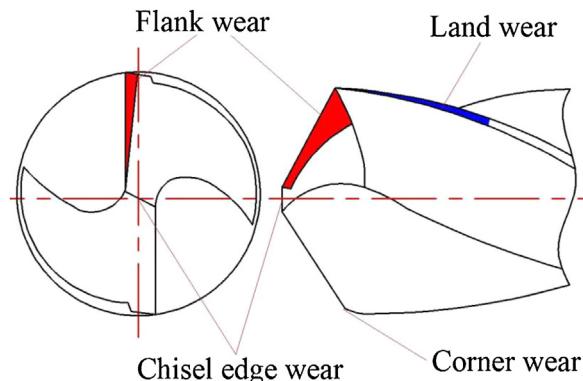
Schematic drawing of different forms of tool wear in drilling [47].
